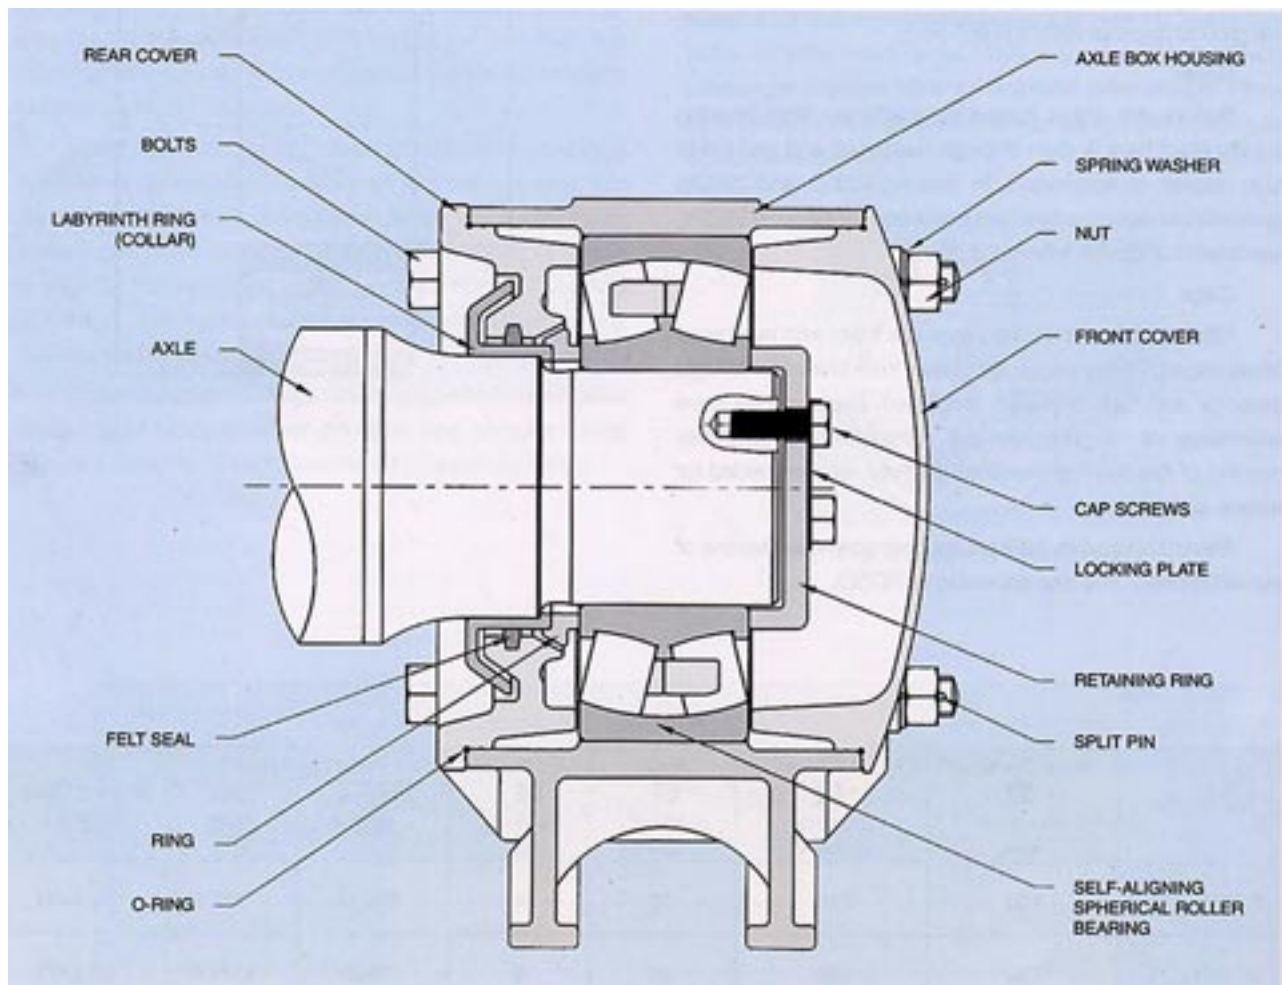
Spherical Roller Bearing and Axle Box Assembly
